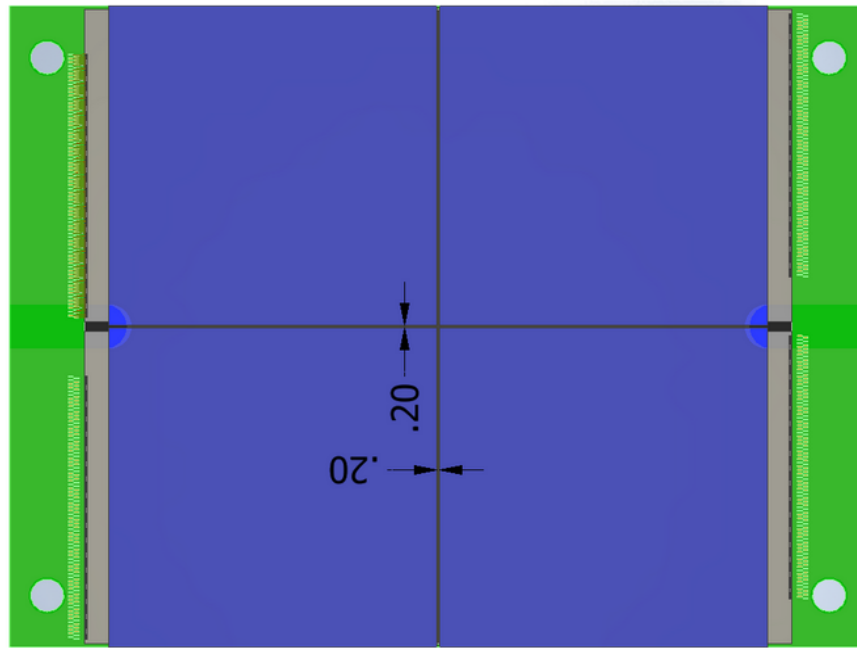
Positioning of ETROC+LGAD subassemblies on the module PCB
